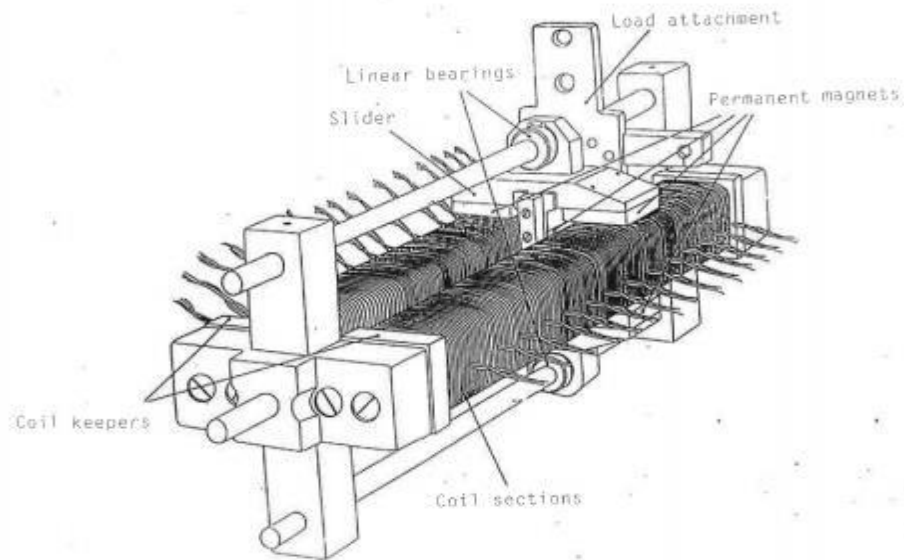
Double armature brushless DC linear motor with multi-section of armature winding [66].
